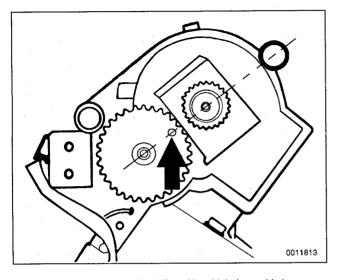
Sunroof motor in "closed" position. Hole (arrow) in large gear aligns with shafts on both gears (to mid-1994).
